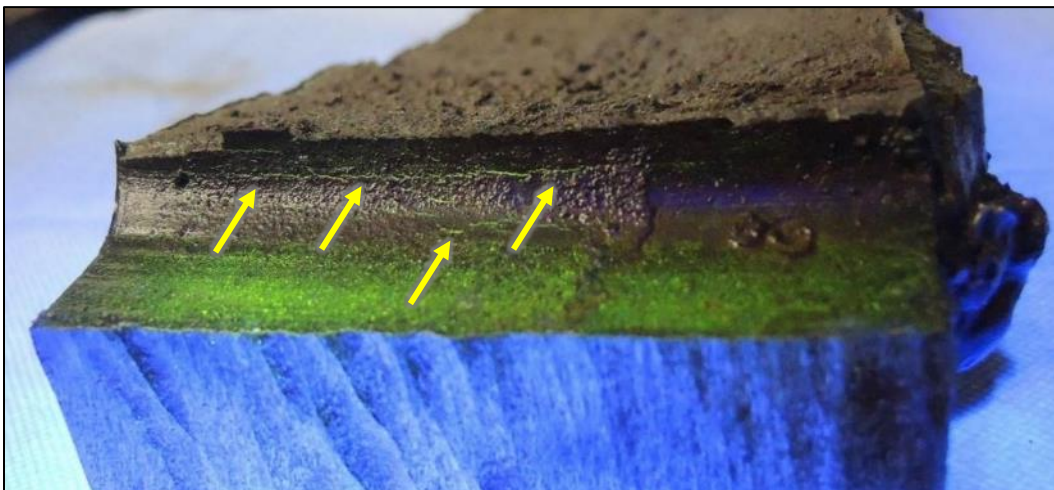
Cracking in the radius of the thermally cut access hole surface of sample D.4-SW, as identified by fluorescent magnetic particle testing.
